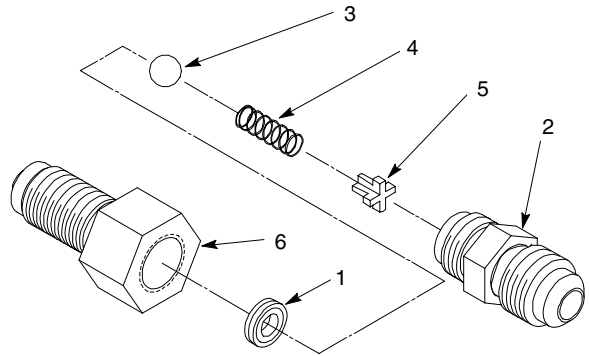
CO<sub>2</sub> CHECK VALVE ASSEMBLY
